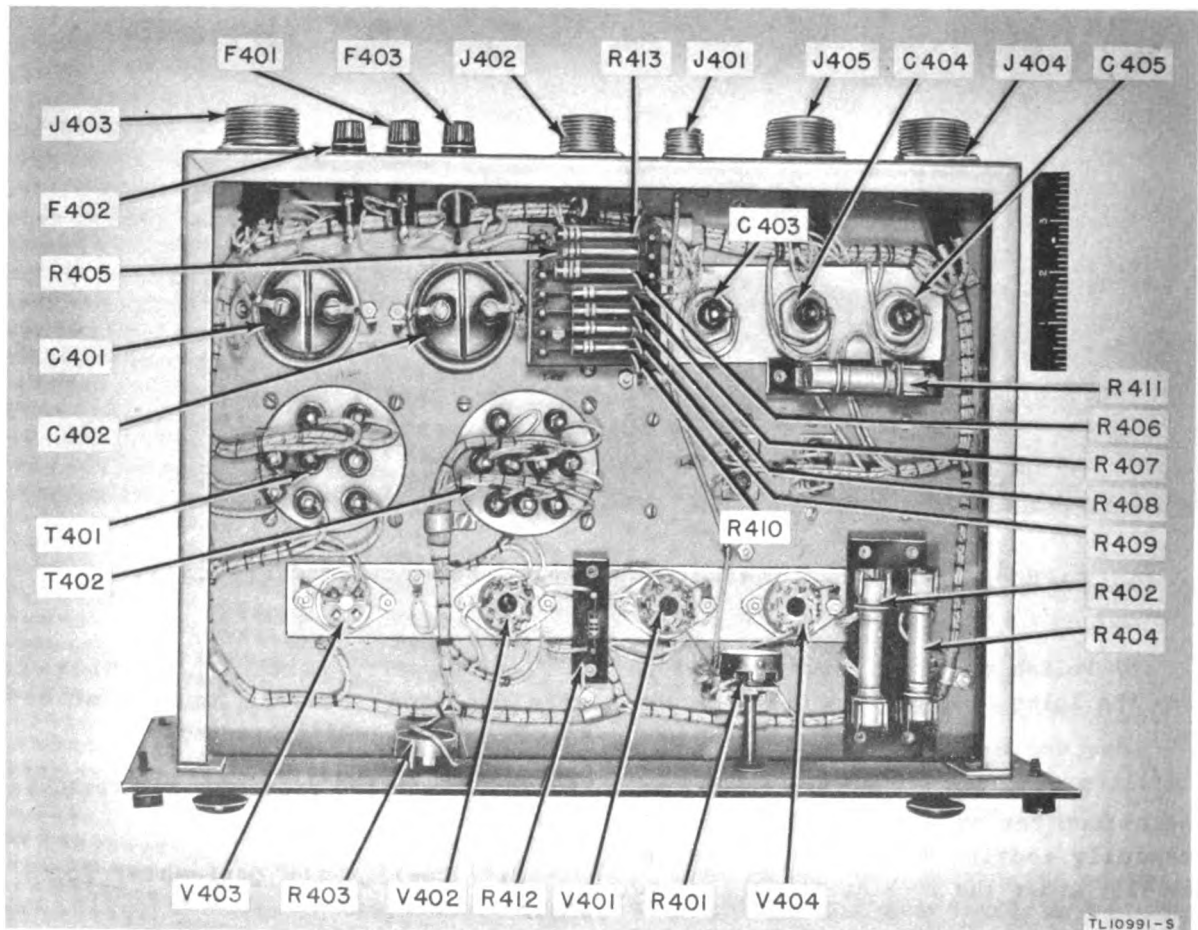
Amplifier-Rectifier Power Unit PP-151/CRD-3, bottom view showing parts location.
